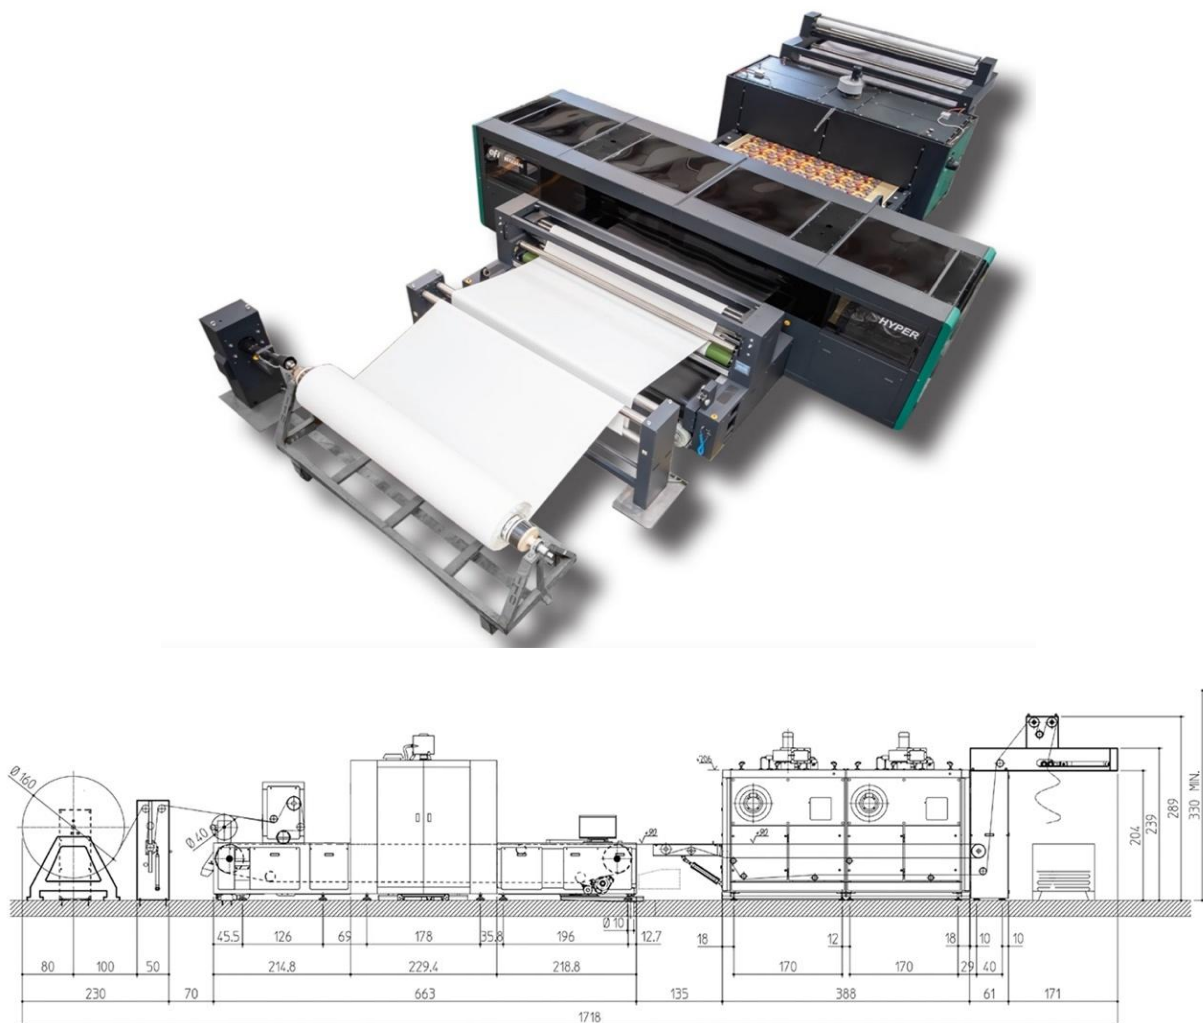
Multi-pass design of the Reggiani HYPER ReNOIR 340 EFI Inkjet textile printing machine: a) photograph of a typical configuration; b) a schematic view with dimensions [7]
